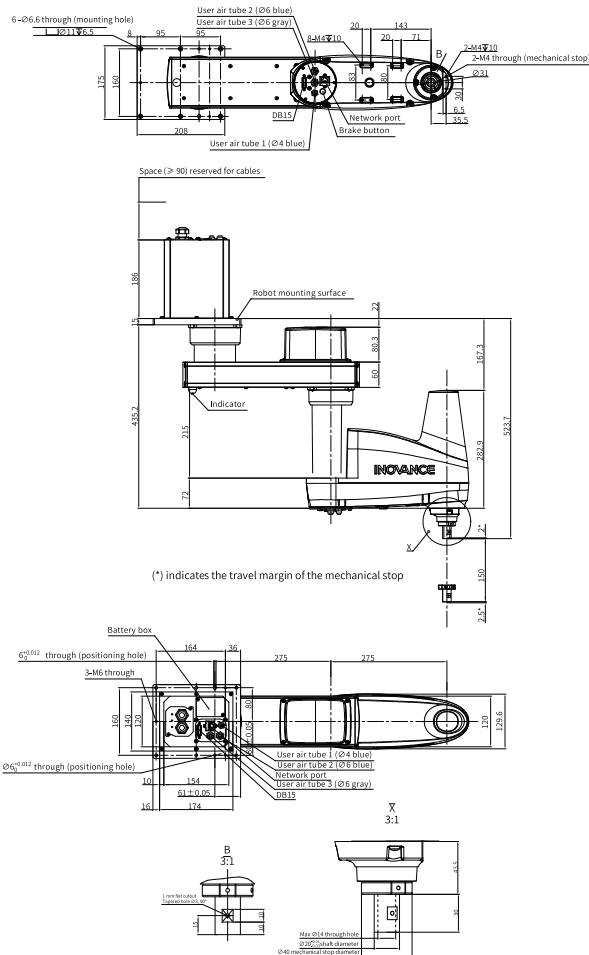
IR-TS5-55Z15S3 outline dimensions
